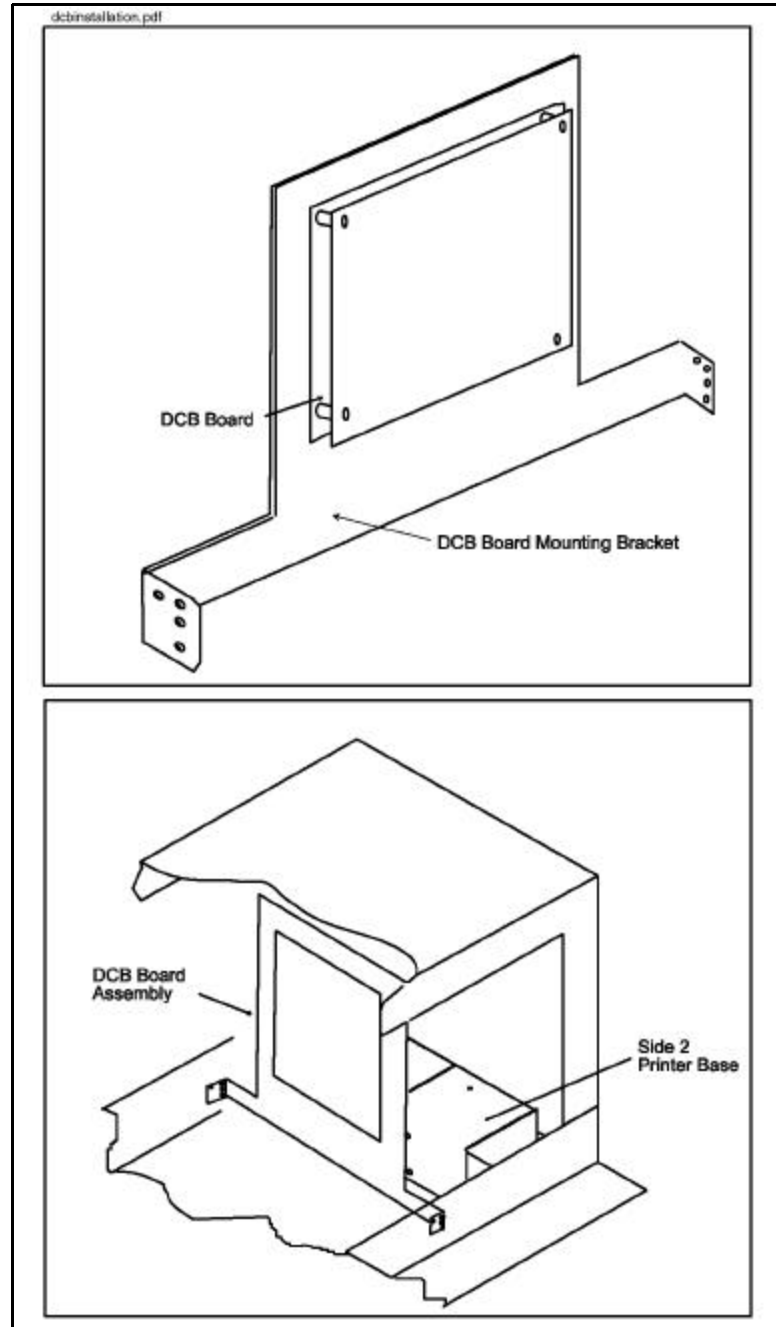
EasyPAY Assembly for Use With Old Printer Base PN 883727-001
